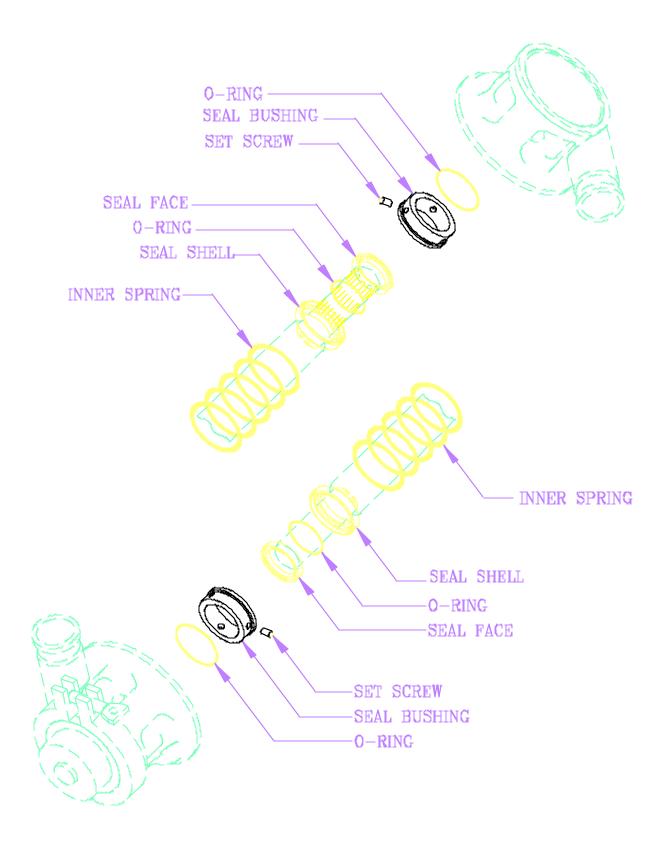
Parts Location Of Standard And Hard Face Seal Assemblies
